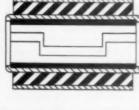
Right: This bearing assembly is employed for the lower inner pivots of the Triumph TR3 front suspension. The Nylastic bushes and thrust washers are shown black, while the rubber sealing rings are hatched with alternate black and white bands
